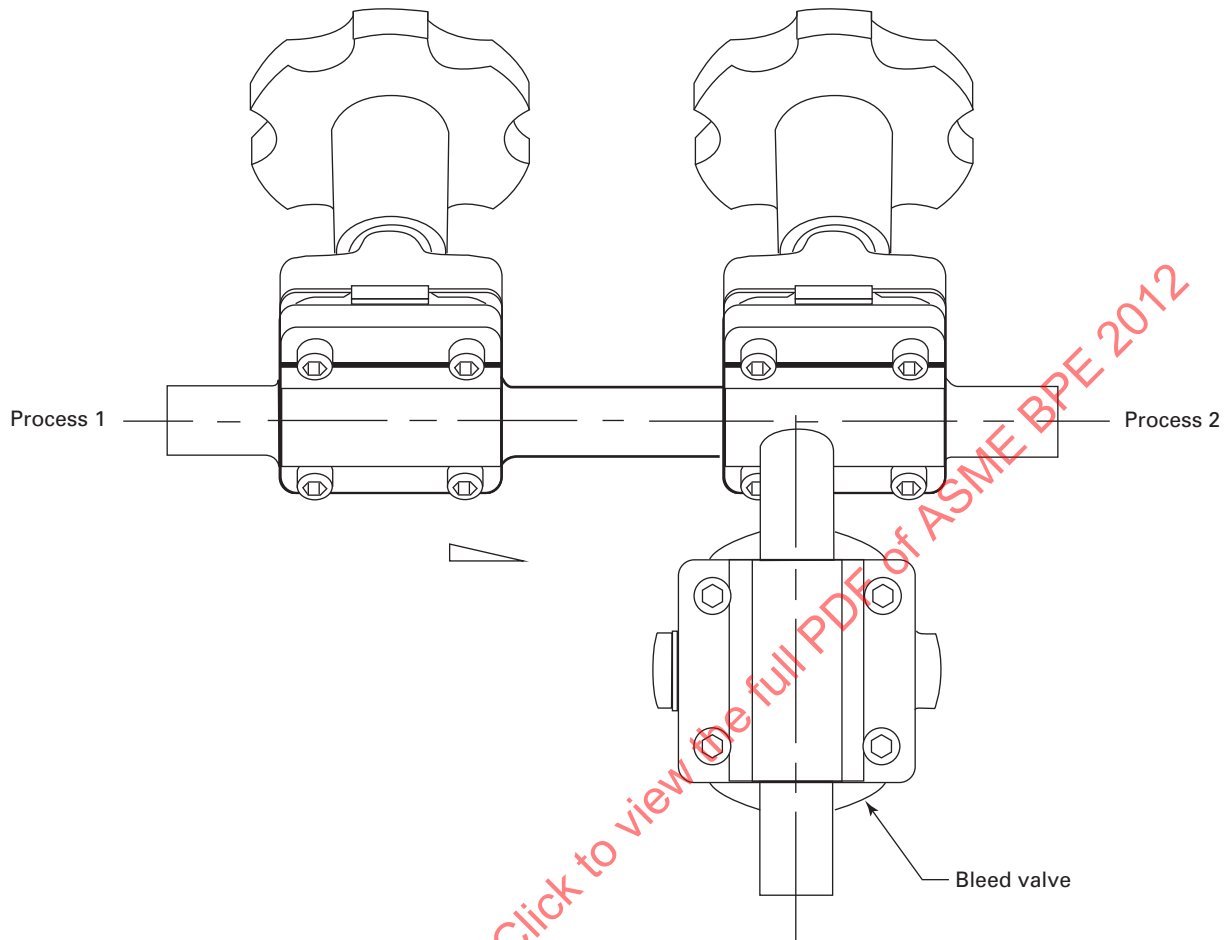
Double Block-and-Bleed Valve Assembly
